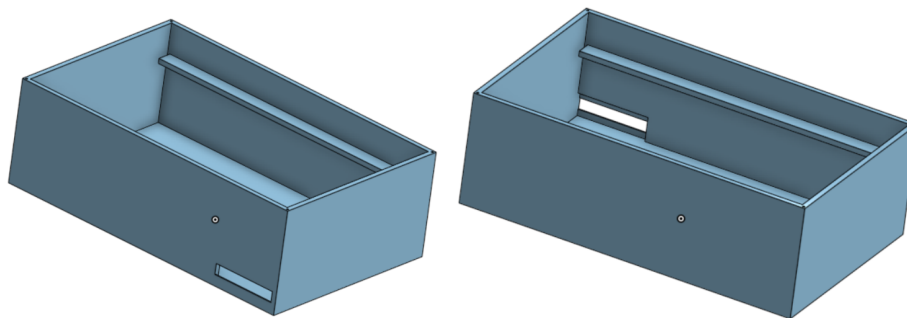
(Housing prototype): Front view(left) and back view(right) of the housing design
